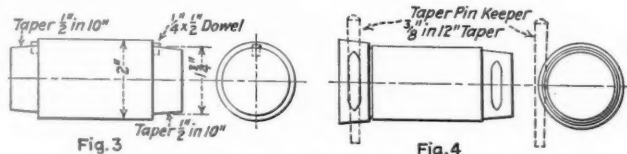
One style of link-block pin for Walschaert gear; Fig. 4—Modern type link-block pin, secured by tapered pins
